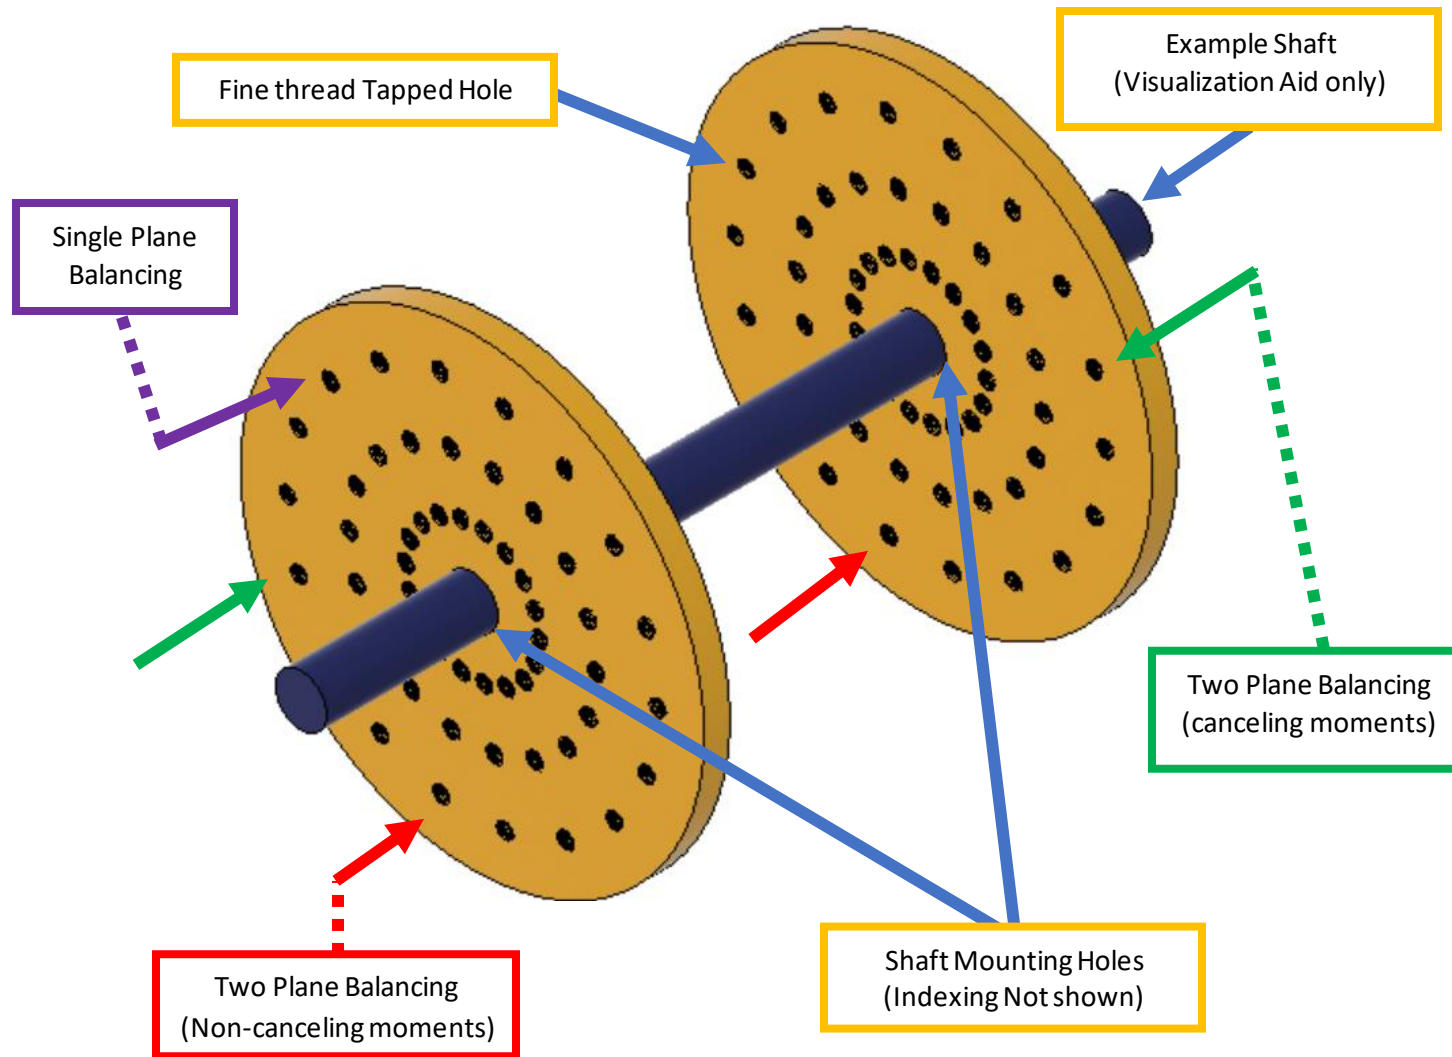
Grooved plate balancing mechanism detail view of CAD model
